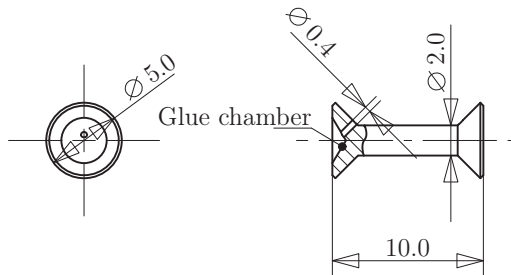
/ Main dimensions of the actuator with a break-out section view of the glue chamber (drawing scale 2:1).
